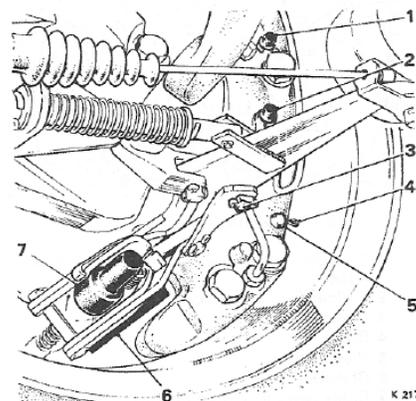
REAR BRAKE CALIPERS (LATE CARS)
